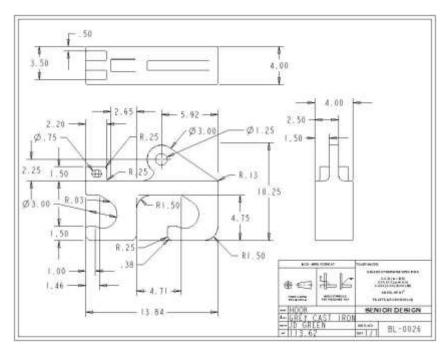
Detailed drawing of the weight hooks for the weight rack. The sliding hole for the locking mechanism is clearly shown on the hook.
